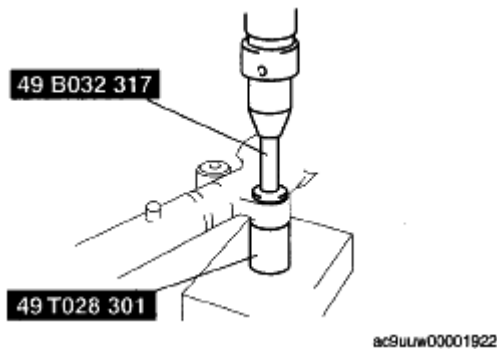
Pressing Mounting Rubber Out From Gear Housing Using SSTs And Press
